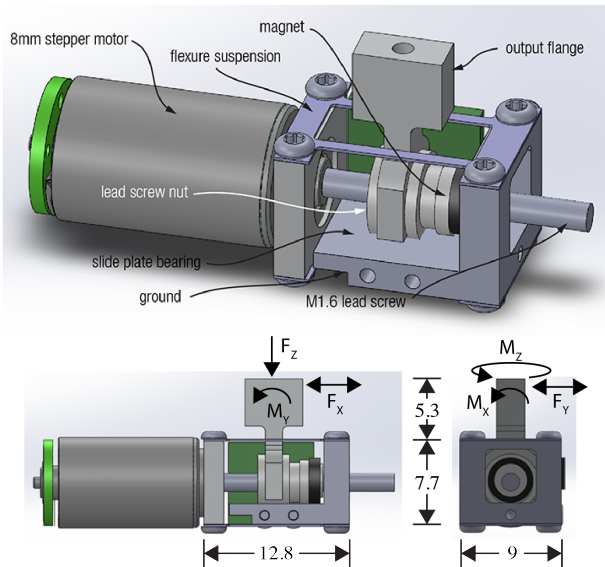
Design of the actuator assembly using direct drive lead screw. All dimensions are in millimeters.
